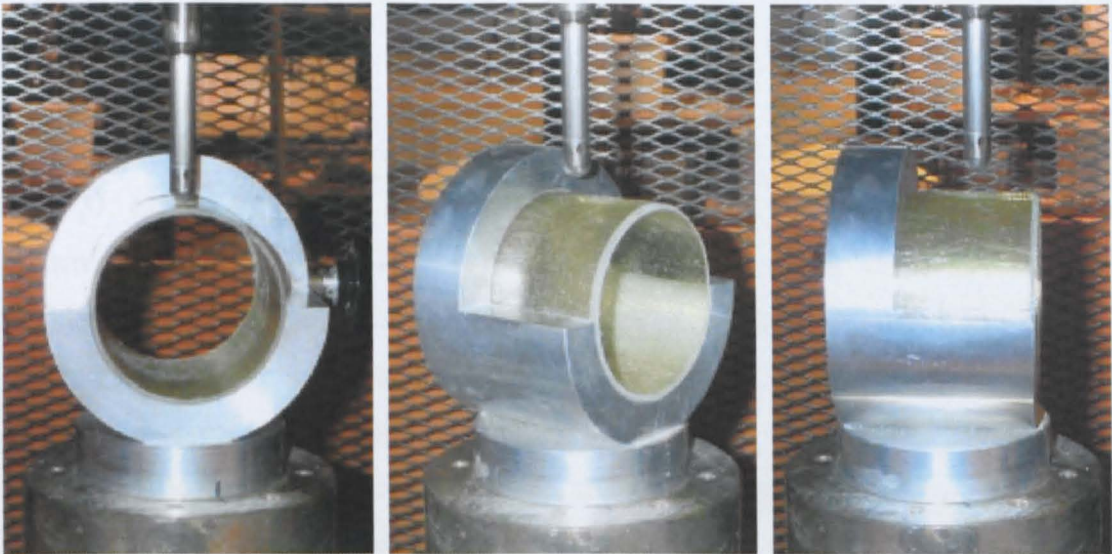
Fixture used to add damage to and drill large (89.1mm diameter) tubes
